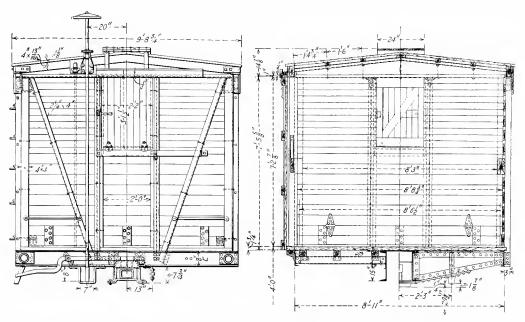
End Elevation and Cross Section of Missouri Pacific Steel Frame Stock Car Shown in Fig. 364.
